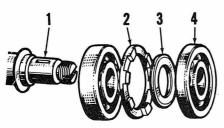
Right crankshaft spacer (2) should be installed as shown with lugs toward bearing (4).
